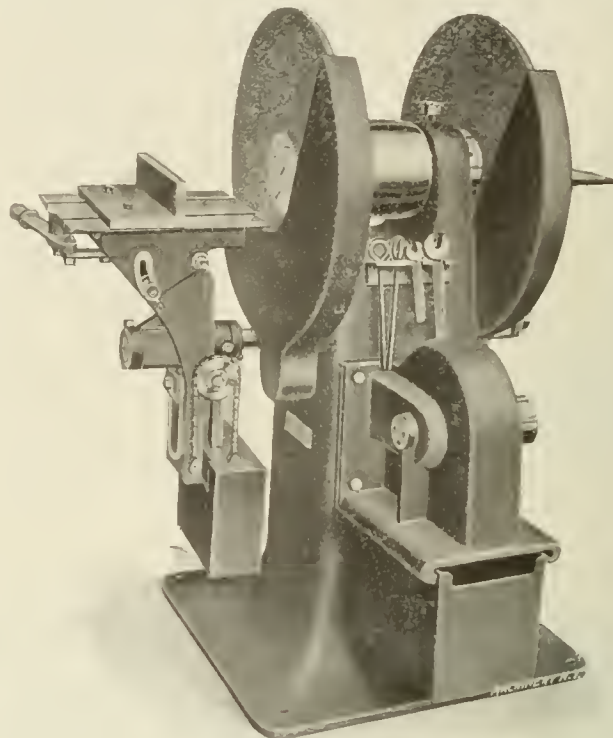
Rear View of Disk Grinder, showing Self-contained Dust Exhauster
